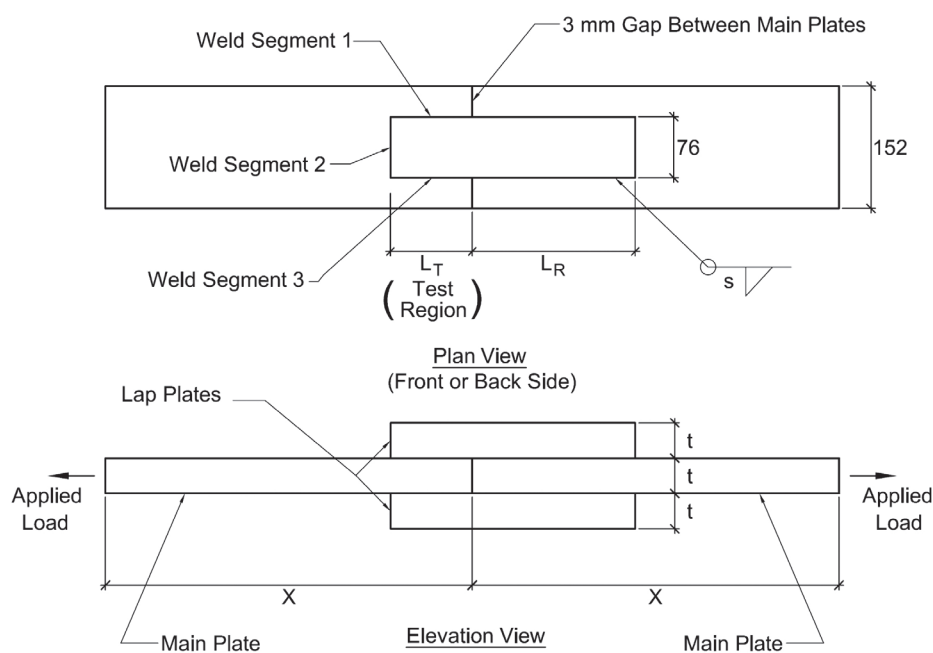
Typical lap plate connection combining transverse and longitudinal welds (TL specimens).
